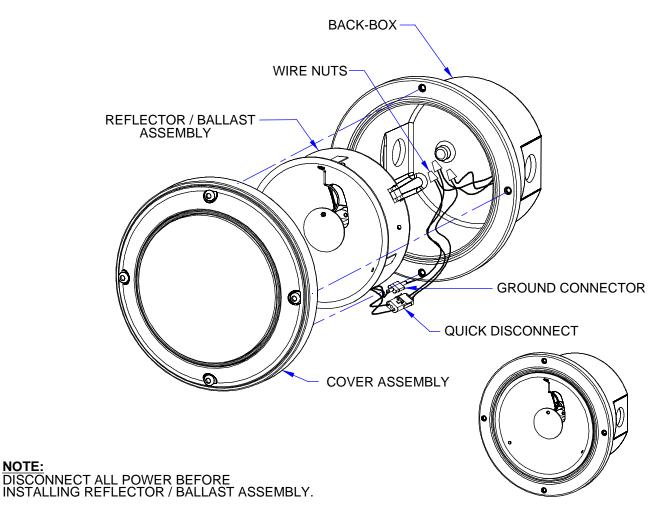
DETAIL REFLECTOR / BALLAST ASSEMBLY AFTER SNAPPED IN PLACE
